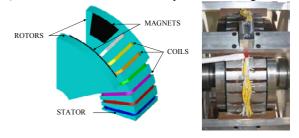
One sixth of the seven-phase studied machine (left), whole machine (right)
